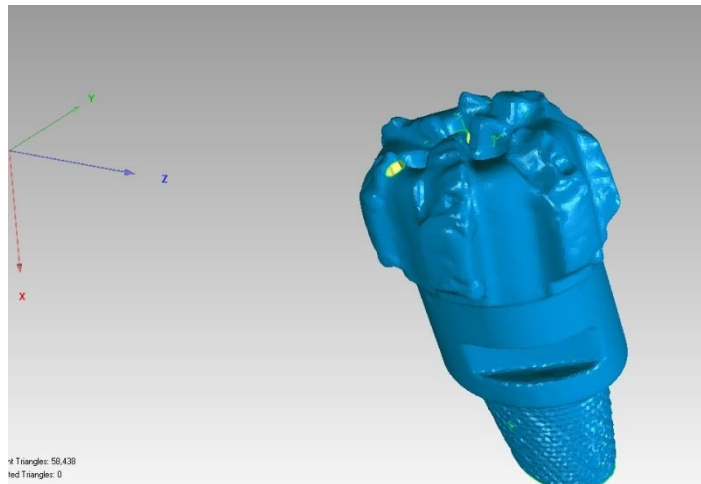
3D CAD drawing of scanned PDC drill bit.
